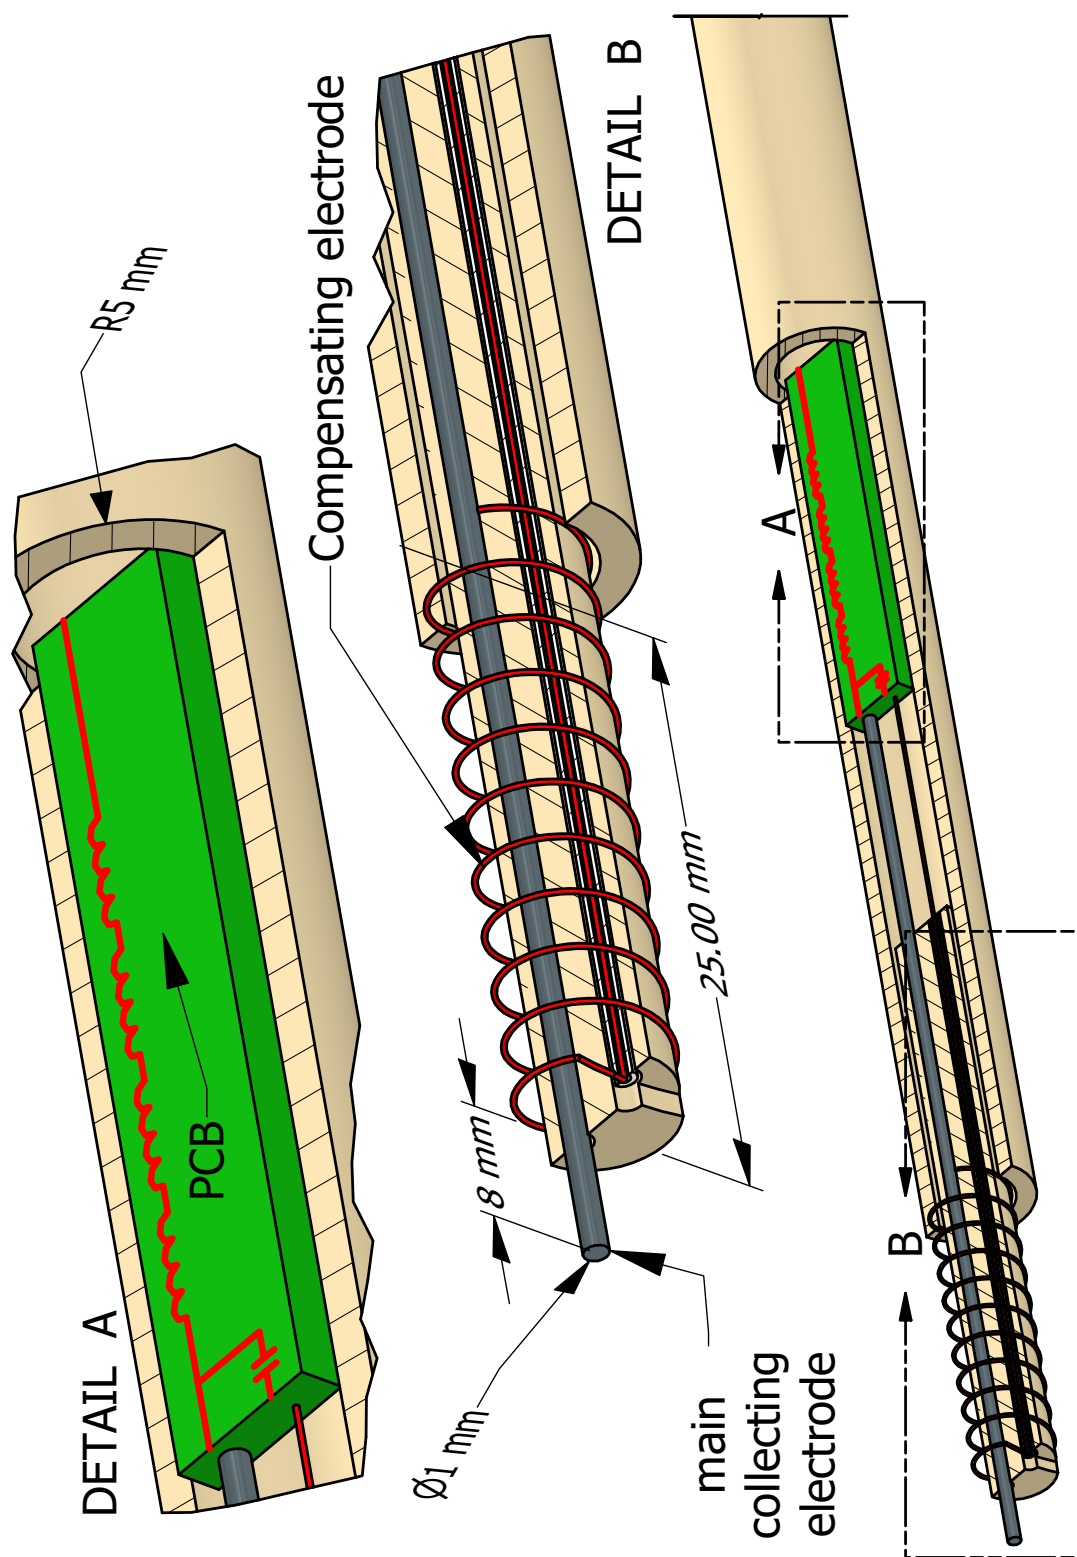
Detailed 3D CAD drawing of the Langmuir probe tip assembly.
